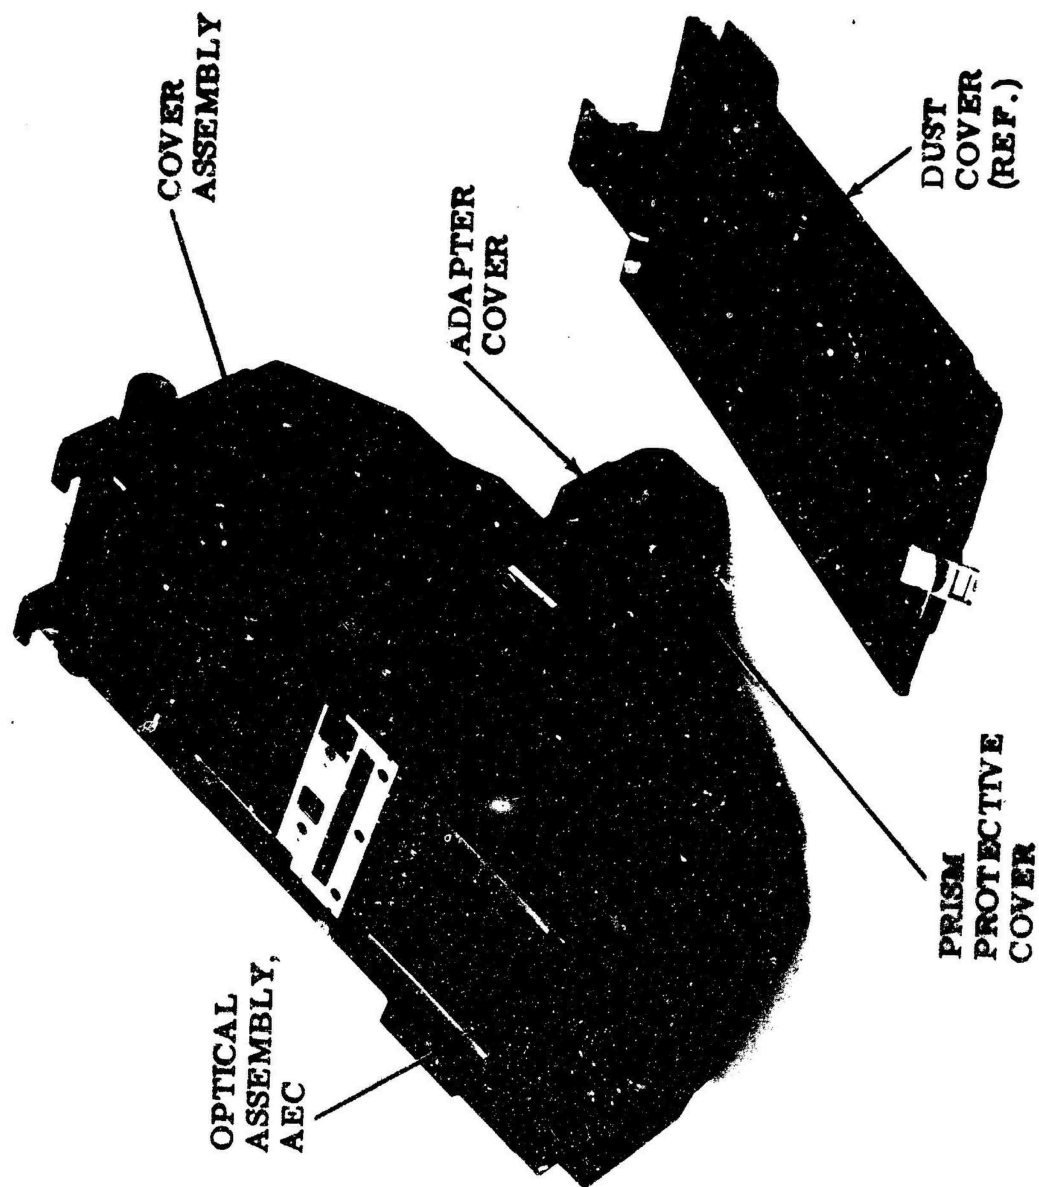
Camera Body Assembly (Sheet 1 of 3)
